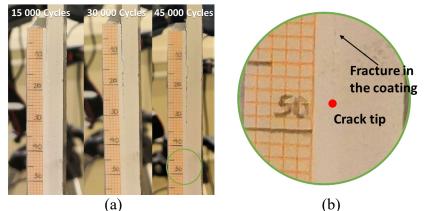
Visual inspection: (a) examples pictures taken at different points during a fatigue test (specimen #1) to measure crack propagation; (b) detail of the picture taken at 45 000 cycles
